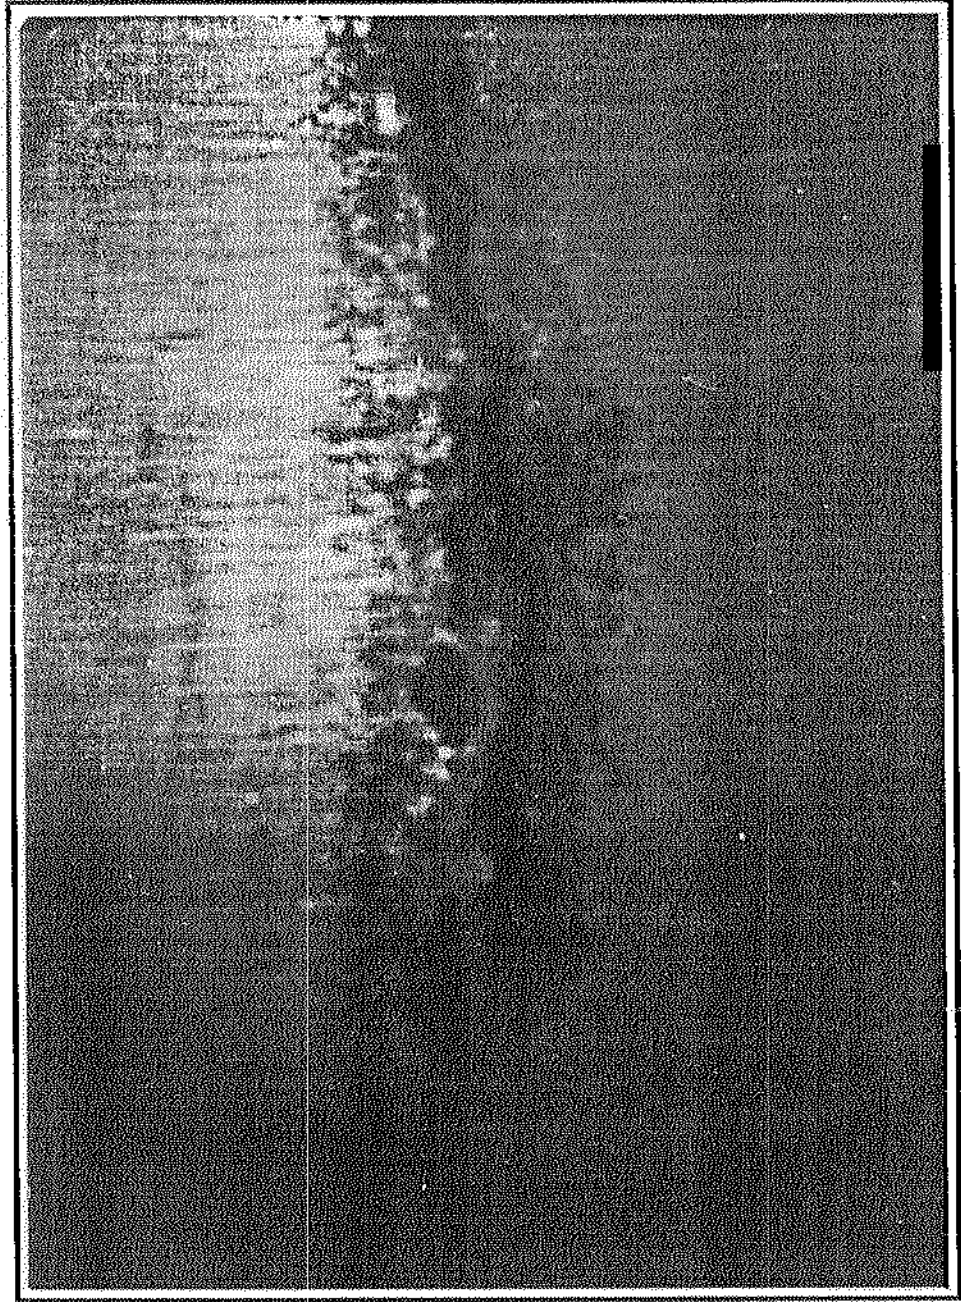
The macrostructure of the fracture surface (15X)
